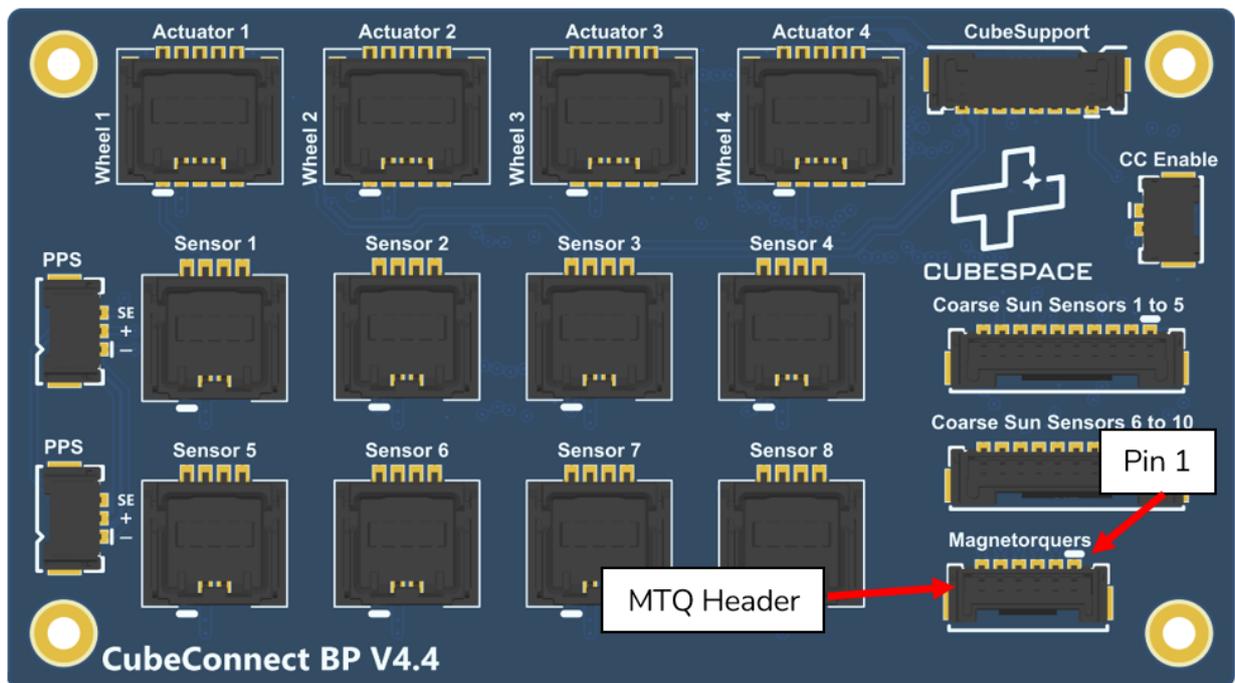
CubeConnect PCB, Backplane Variant - Magnetorquer Header
